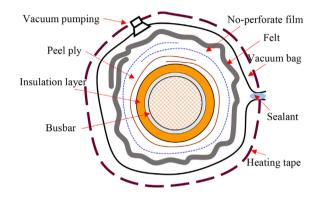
The cross section sketch of vacuum bag curing technology setup for the superconducting busbar.
